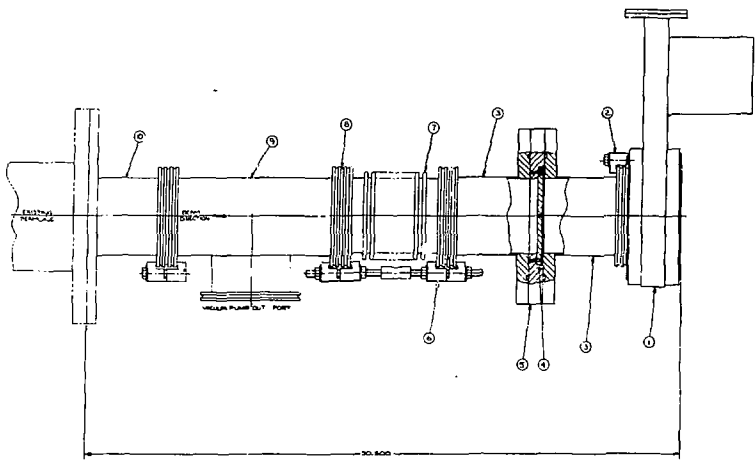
Vacuum/air interface assembly with orifice assembly.
